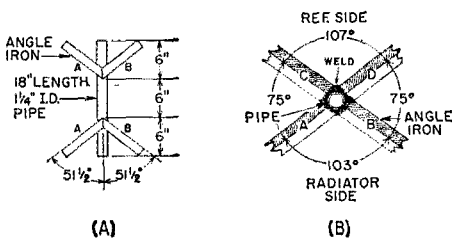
The spreader mounting bracket. Two sets of four pieces of angle iron, welded to the center pipe, support the bamboo spreaders at the correct angles to provide proper spacing. (A) is a front view showing the angle pieces that support the spreaders for the radiators. Reflector supports are to the rear. The valleys of all angle pieces should be facing upward in this view. (B) is a top view looking down on the bracket and showing the upper set of four supporting angles. Angle pieces of lower set are similarly oriented.
